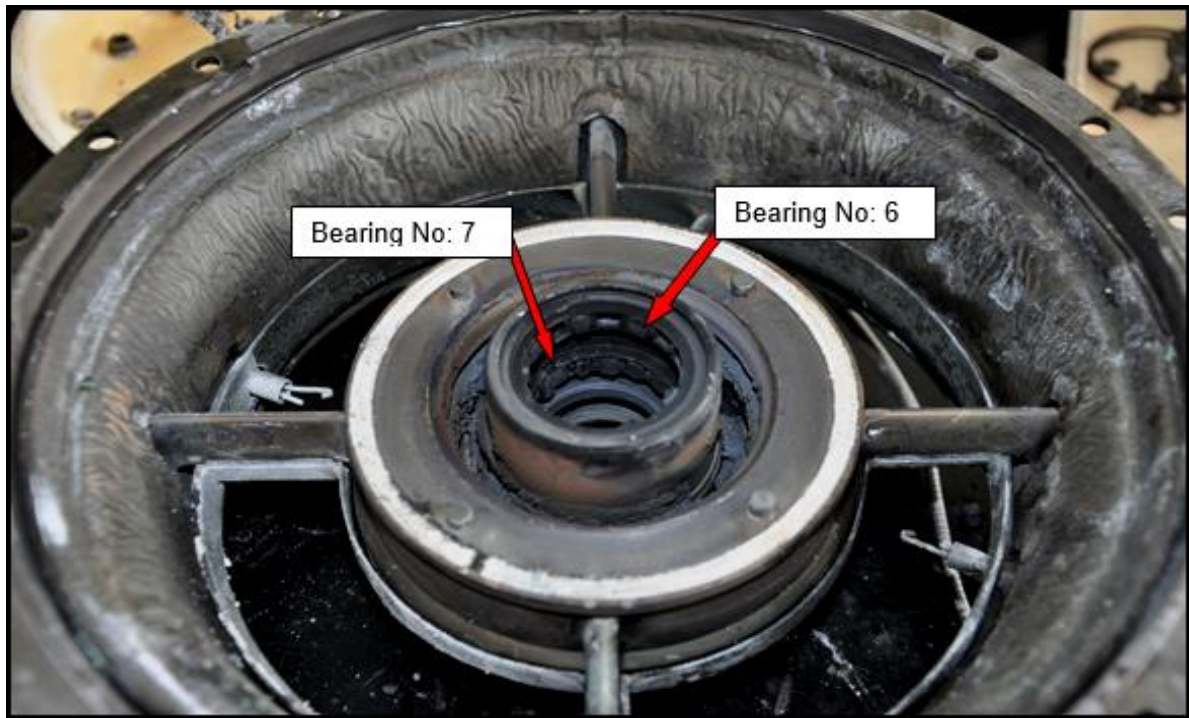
The damaged number 6 & 7 bearings. (Source: manufacture's report)
